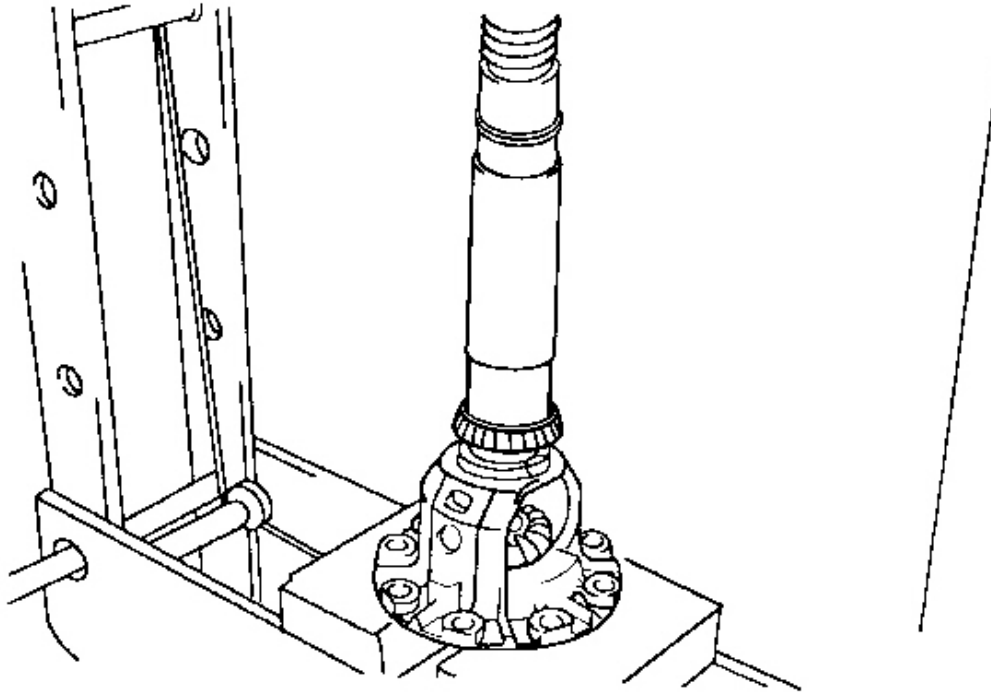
FIPG, Tapered Roller Bearing & Differential Case
